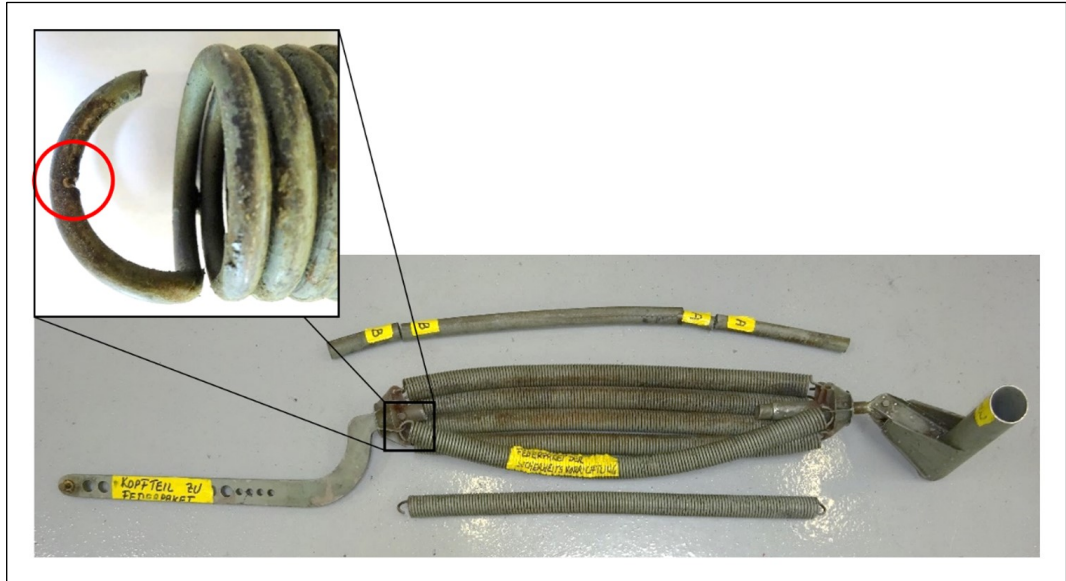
Spring assembly (auxiliary-wing adjustment safety device); spring hooks weakened by wear and tear.
